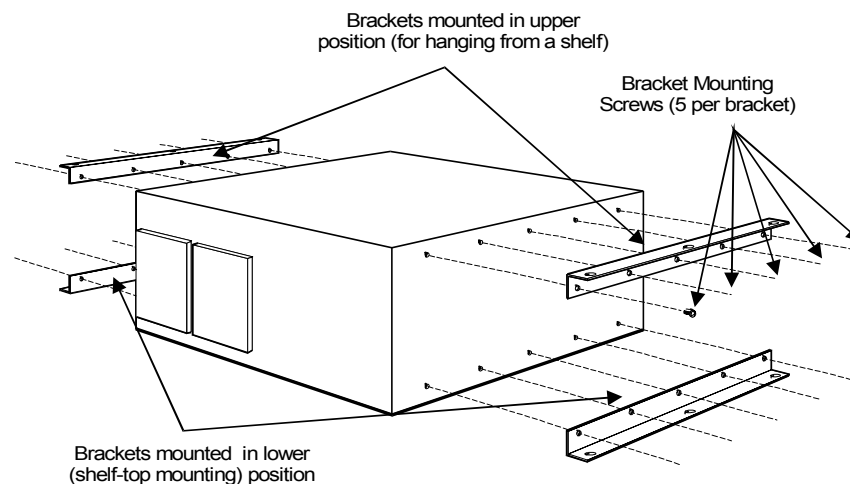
8. Installing Remote Mounting Brackets
